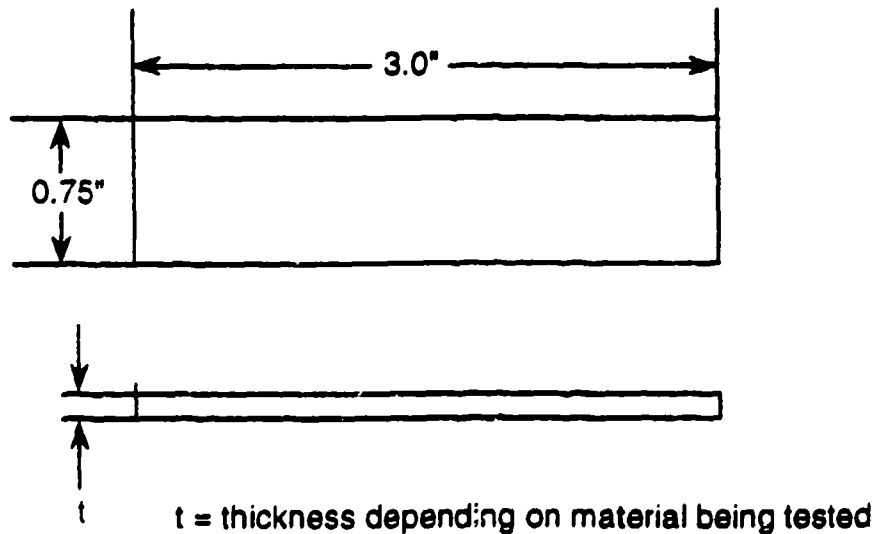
ALMEN STRIP SPECIFIED DIMENSIONS
